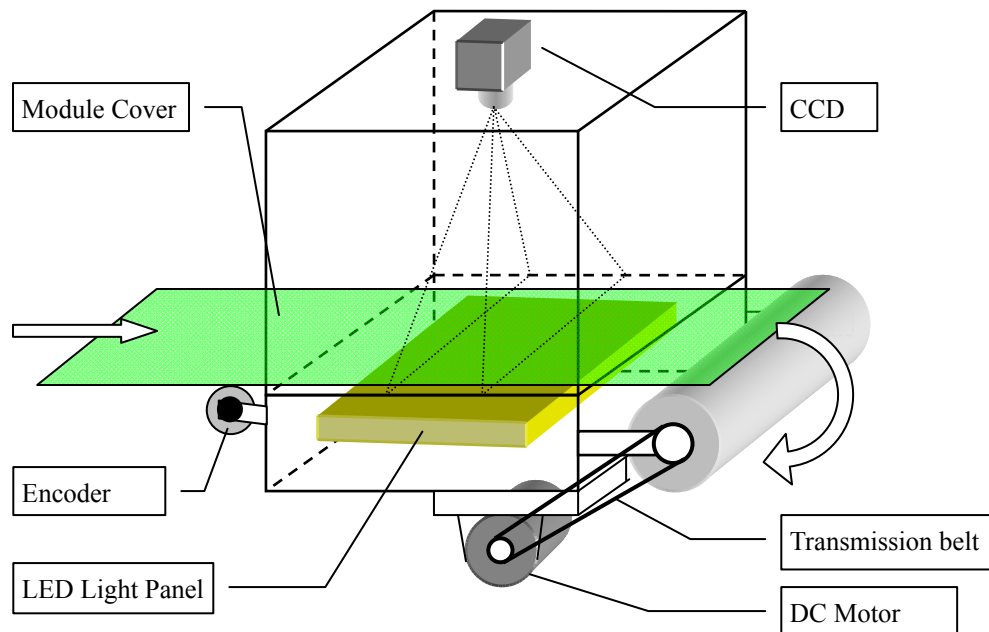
The diagram of the prototype of machine vision inspection system.
